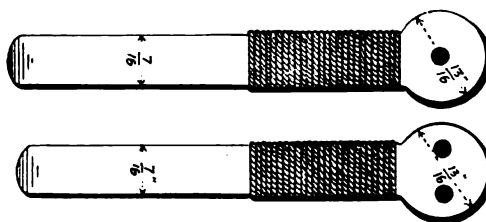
Single and double conductor wedges for use with spring-jacks.
